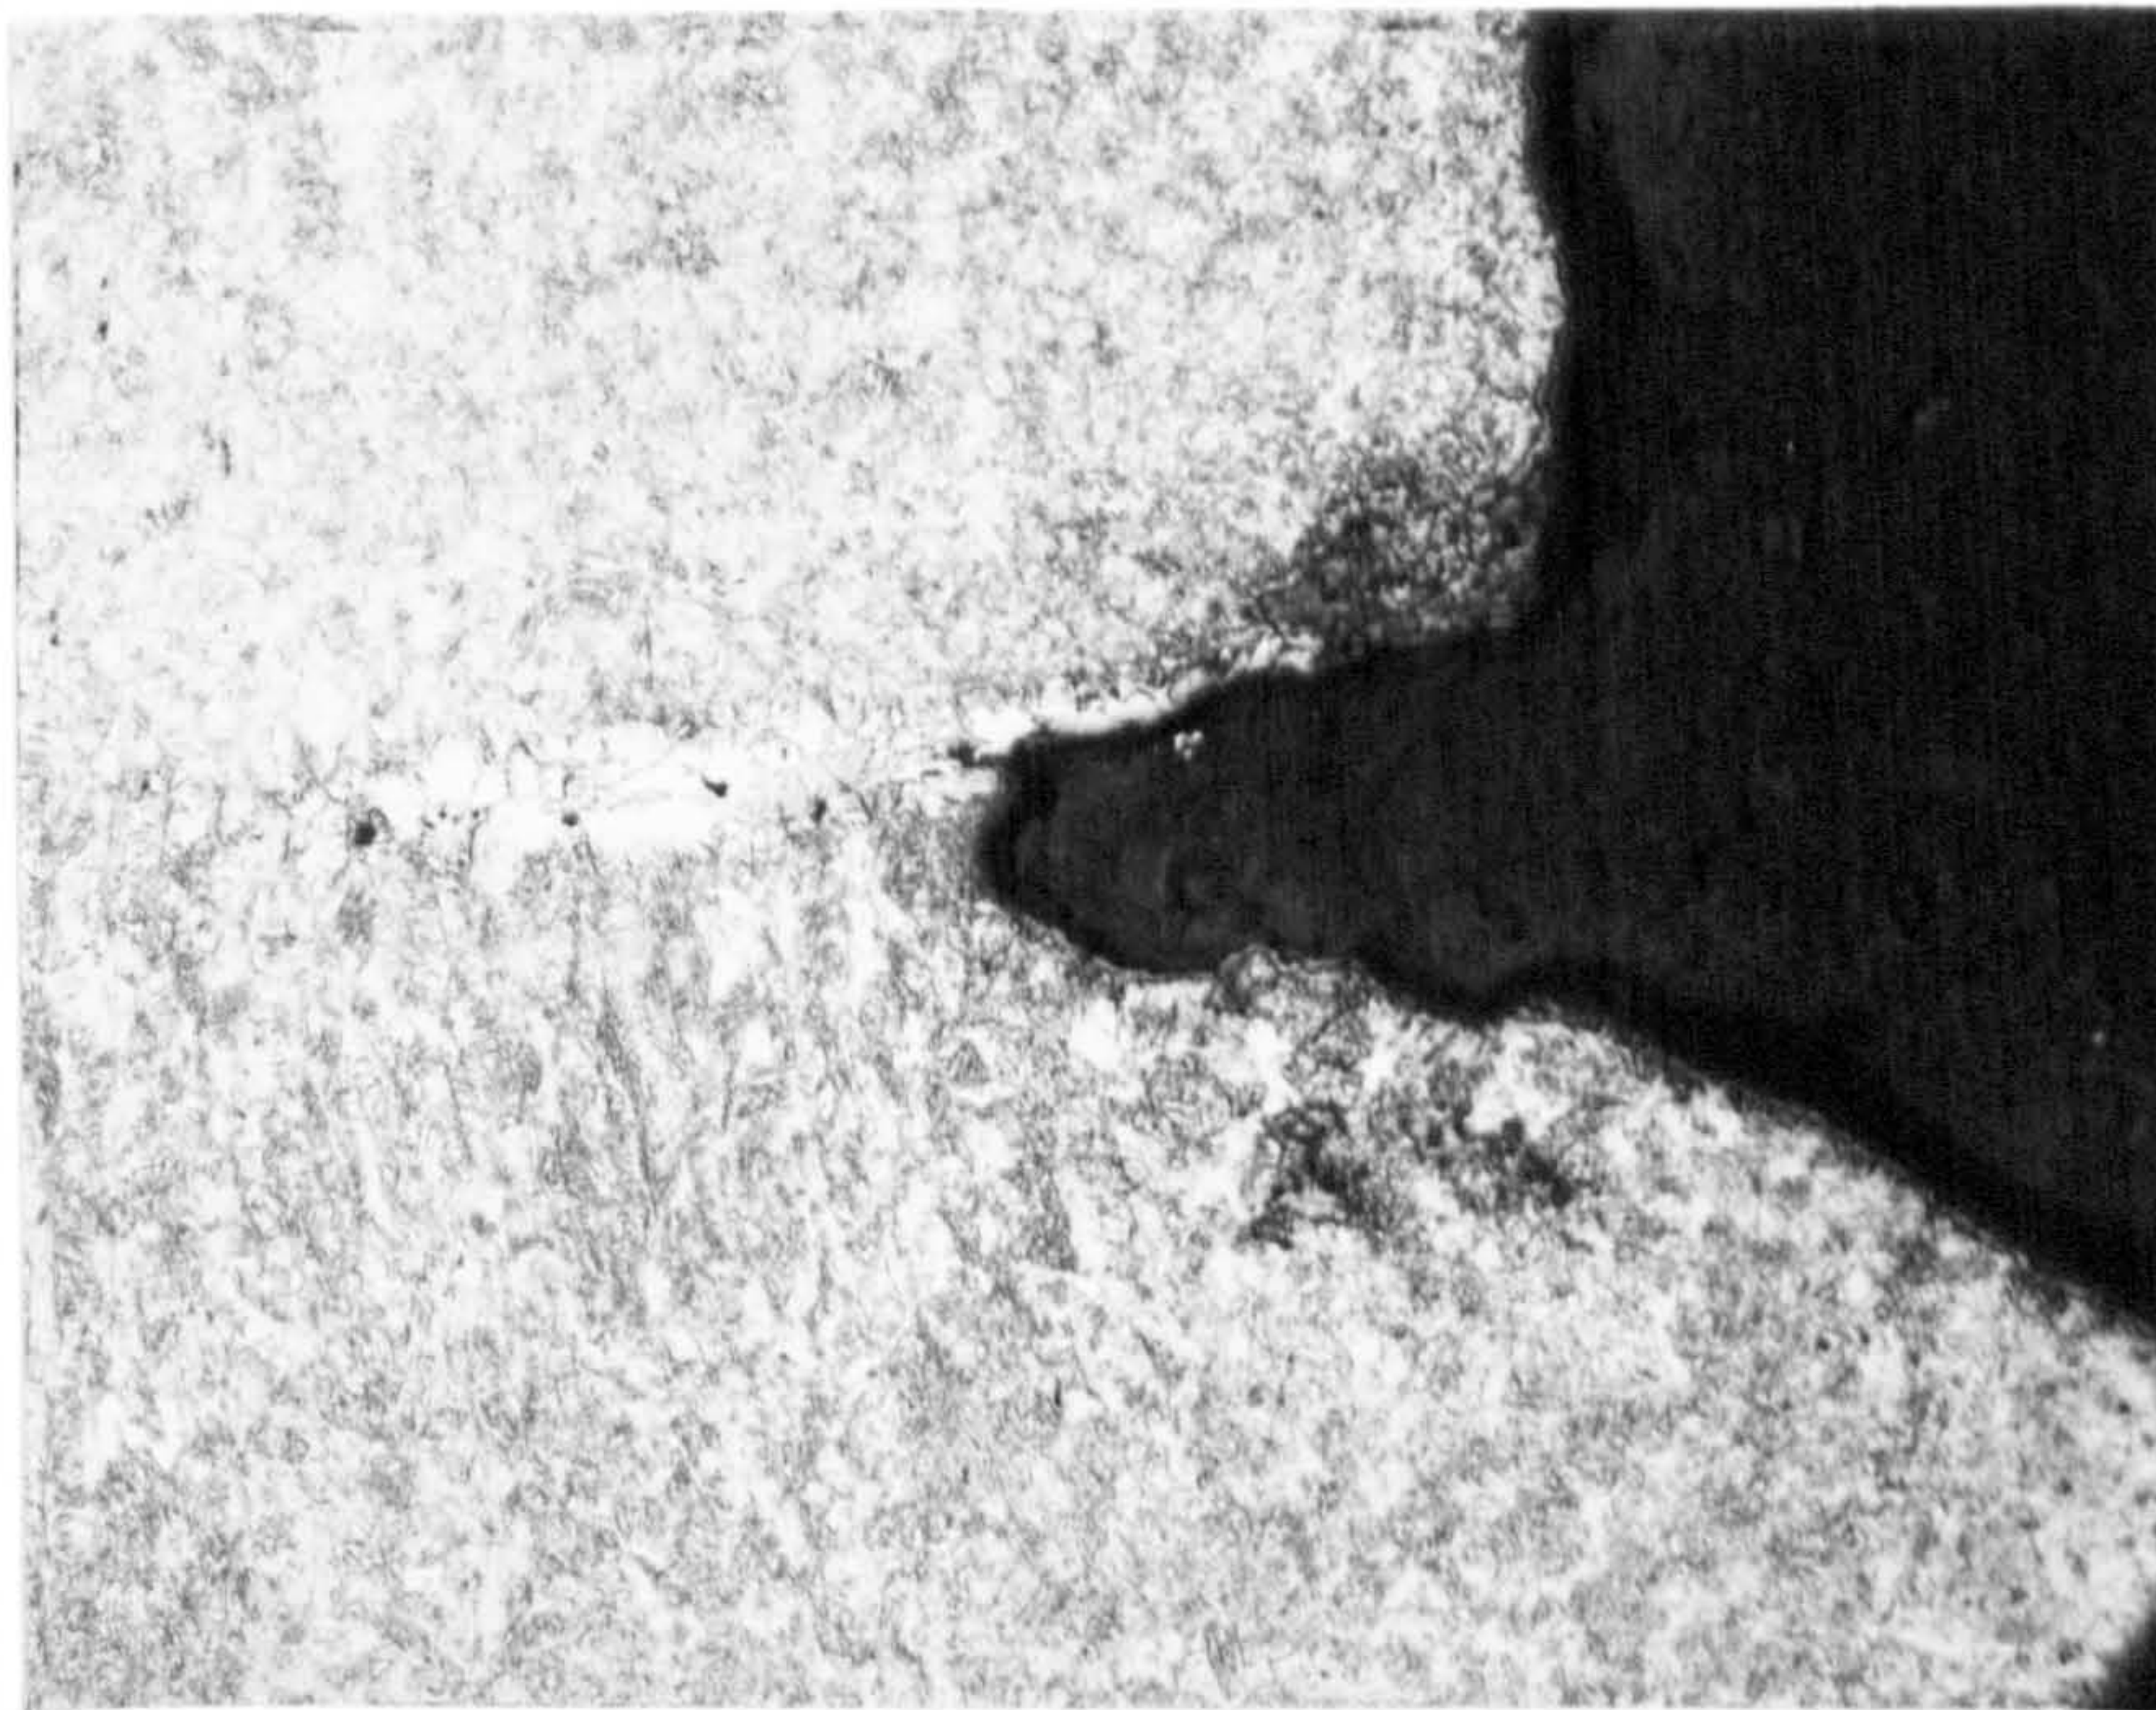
Lack of fusion at the web plate edge due to too low laser beam height in a 10mm skid weld (x80).
